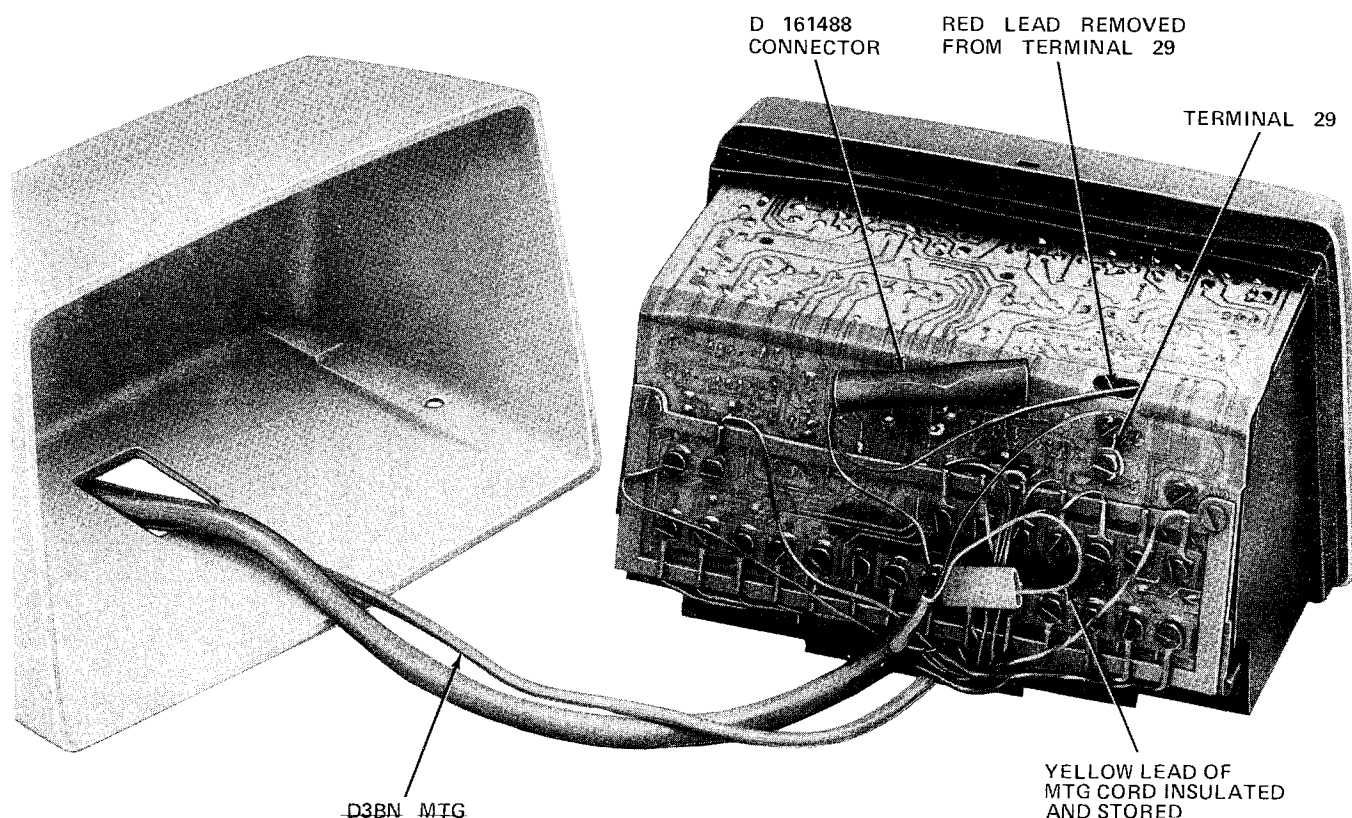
108AA Loudspeaker With Cover Off and D3BN Mounting Cord Connected
